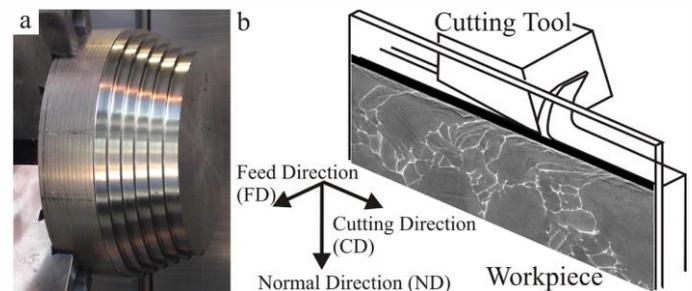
a) Photograph of stepped Ti-834 billet workpiece prior to the outer diameter precision turning trials; b) Schematic illustrating the cutting process and typical subsurface microstructure deformation, sectioned parallel to the cutting direction.
